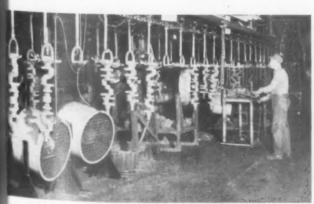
This 1500-ft monorail conveyor carries the crankshafts on alloy hangers from the draw furnace through a water cooling tank to bring the crankshafts to room temperature.
